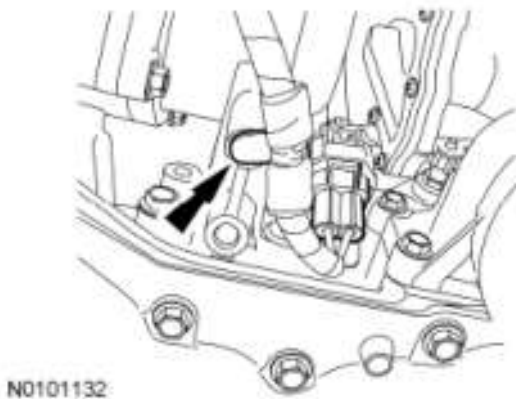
Locating Vacuum Pump Assembly Electrical Connector
